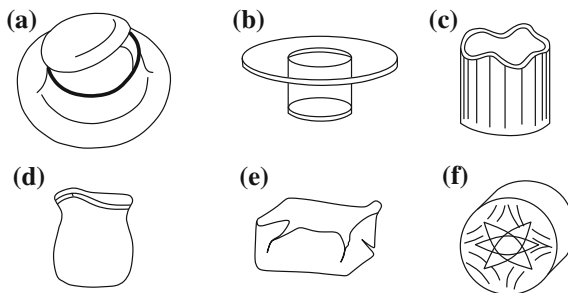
Deep drawing defects [WILH75], (a) bottom tear, (b) shearing, (c) earring, (d) lip formation, (e) body rupture, (f) flow figures
